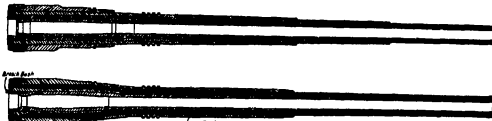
(Upper) Gun built up of steel tubes. Fig. 2.—(Lower) Wire-wound gun.
